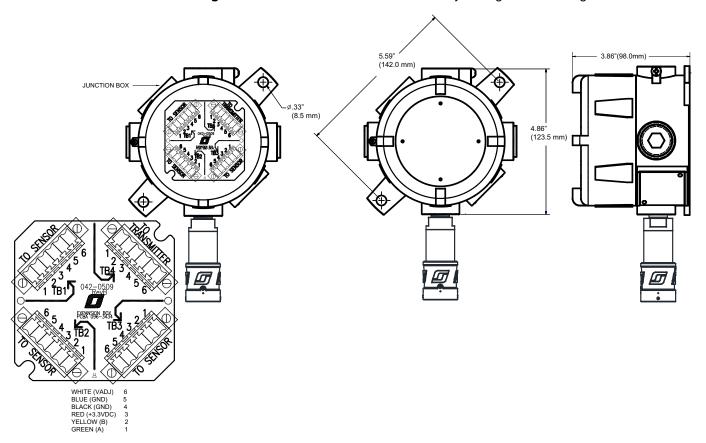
Meridian Junction Box Assembly Wiring and Mounting – Stainless Steel
